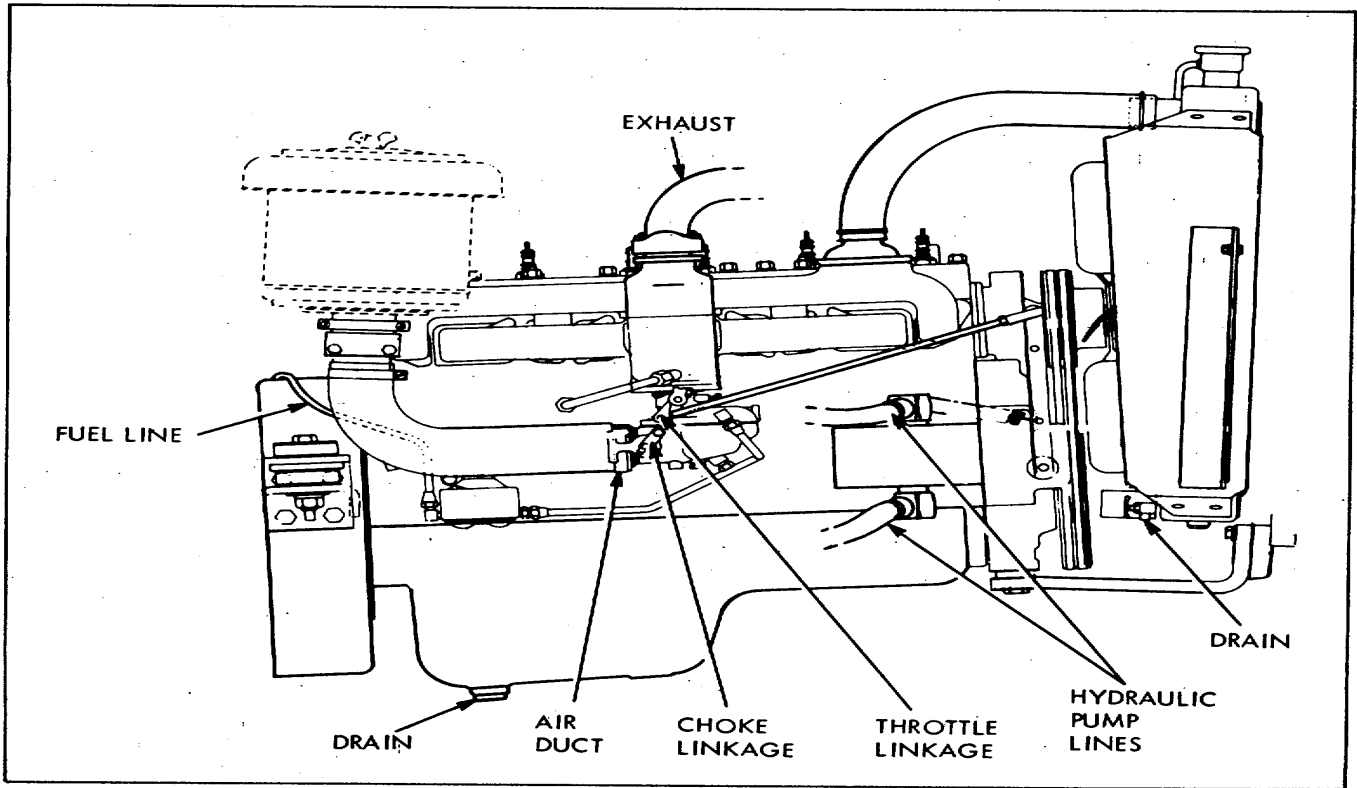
Engine Removal Check Points (Sheet 2 of 2)
